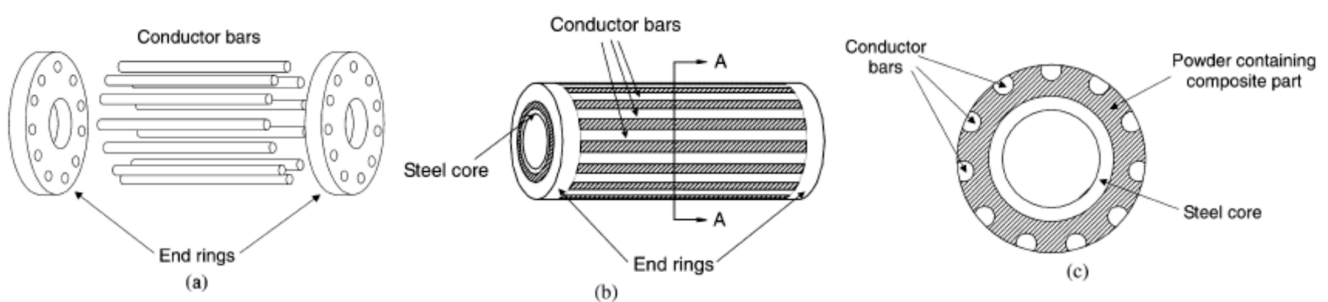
Squirrel-cage rotor: (a) conductor bars and end rings before assembly; (b) steel core, conductor bars, and rings after assembly; (c) sectional view of the squirrel-cage rotor [34].
